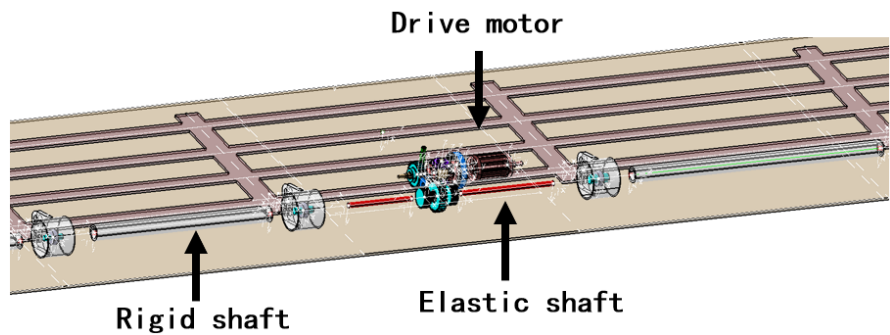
Physical representation of unmanned aircraft cabin door mechanism.
